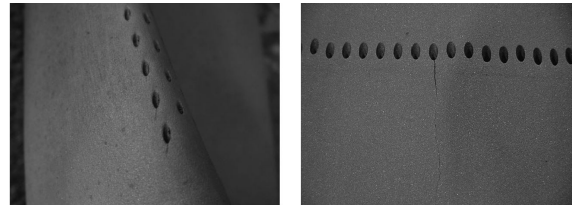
Examples of cracks initiated from EDD holes on rotating blades [10]
